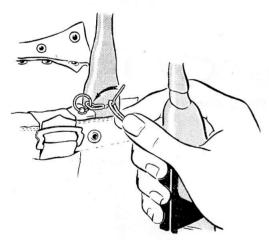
Connecting the beacon to the battery switch pin—4th stage
